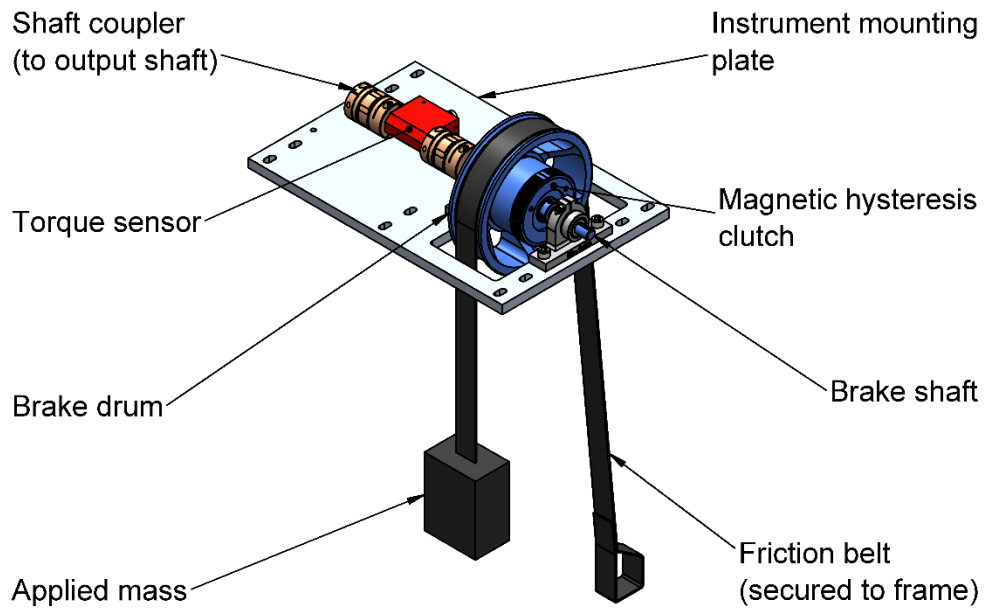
Annotated view of instrument plate and friction brake assembly
